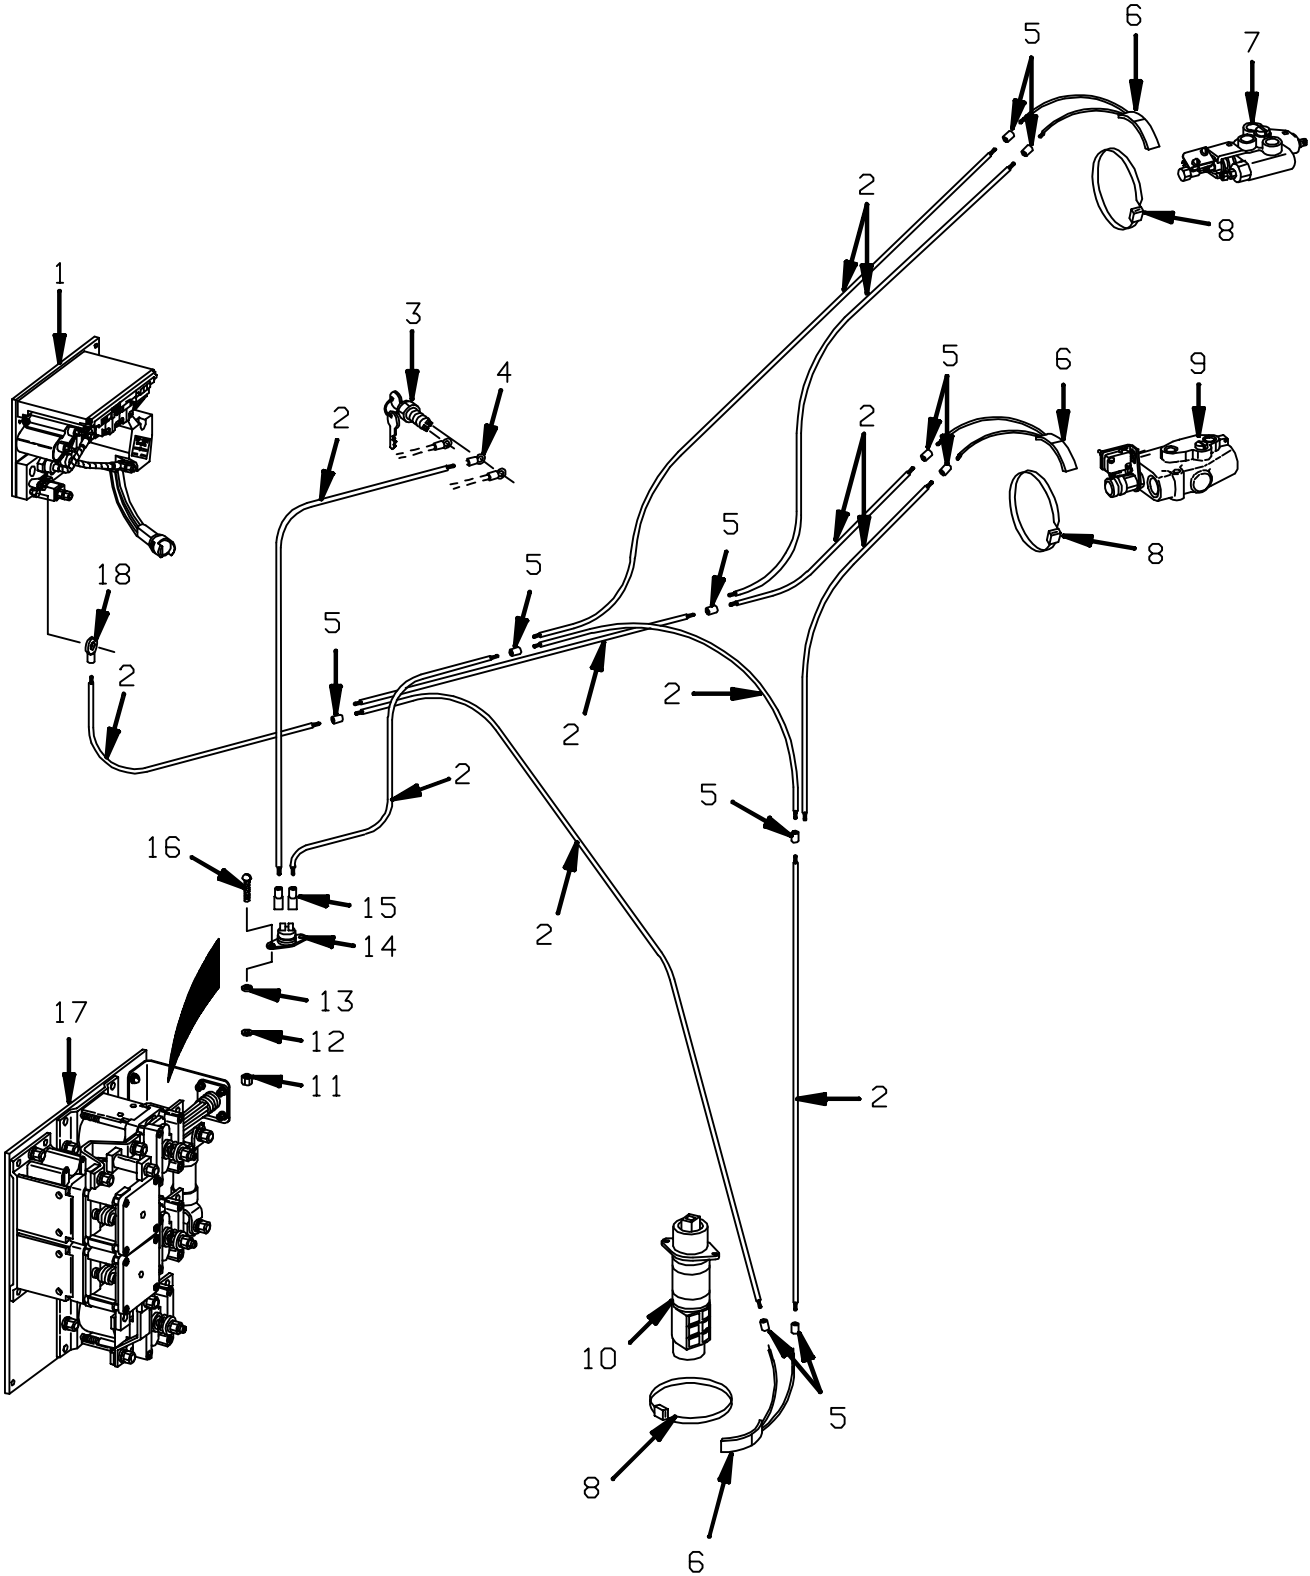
TILT WITH SIDESHIFTER CABLE ASSEMBLY
